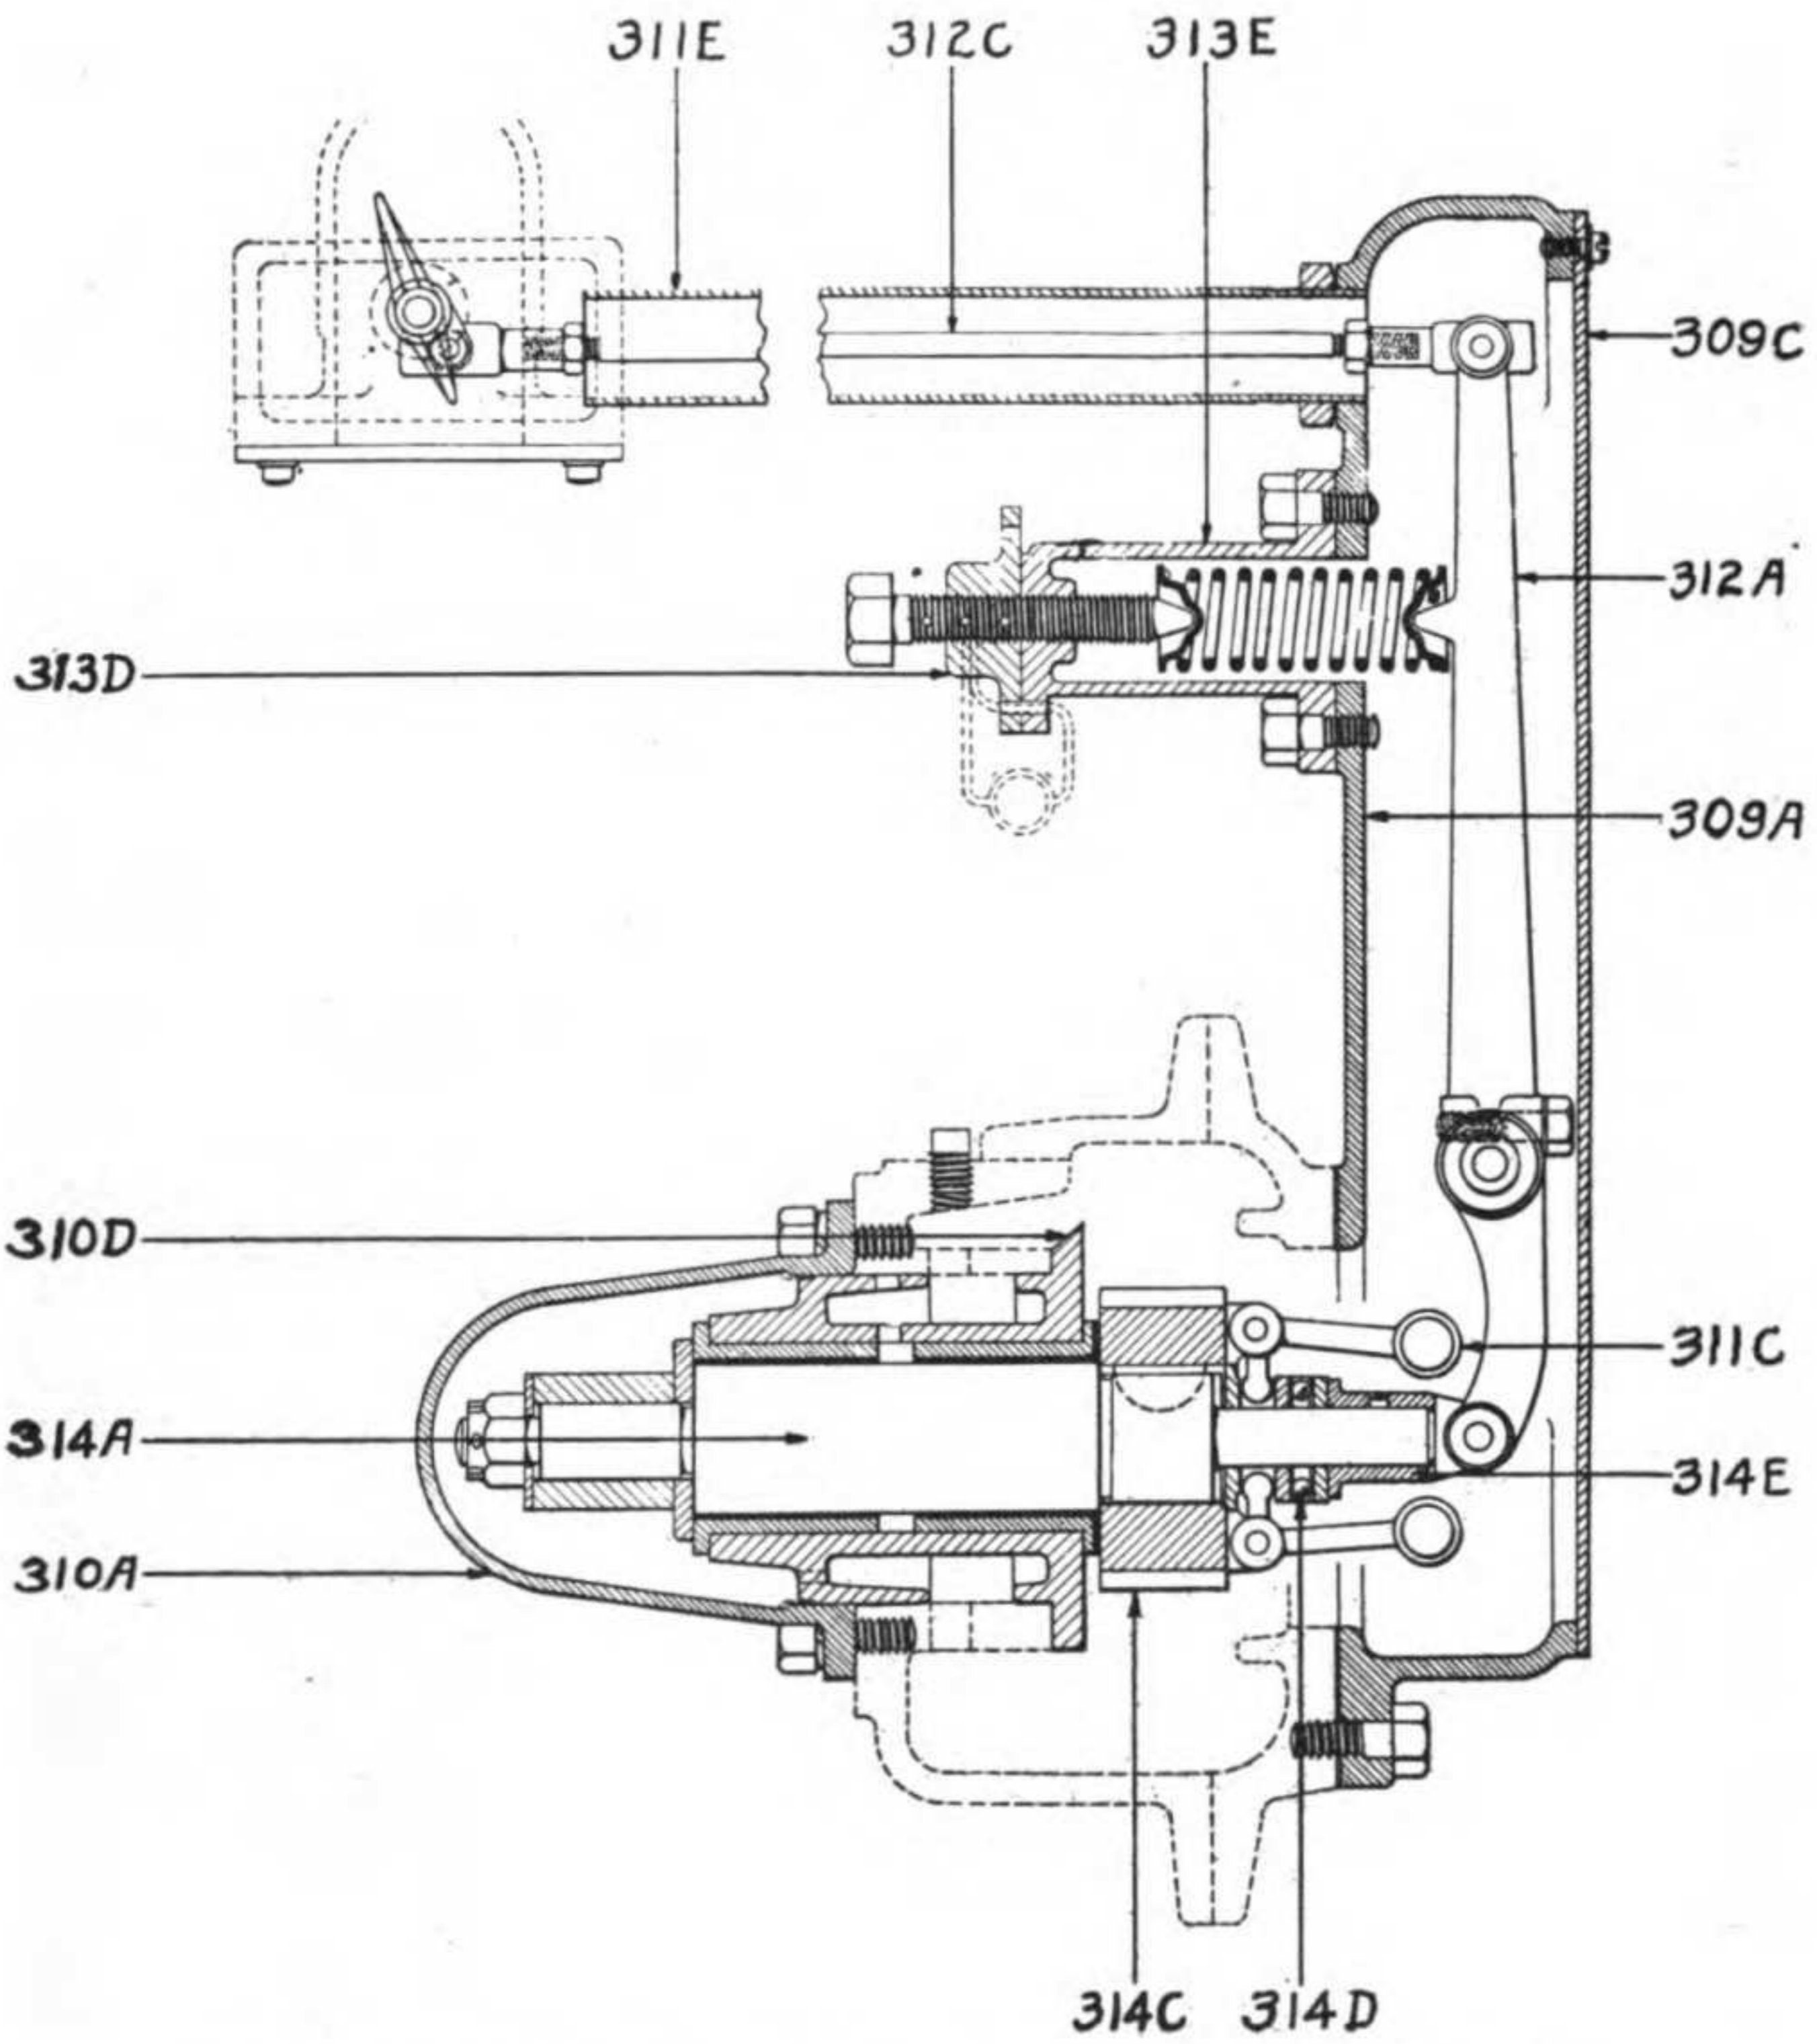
SECTIONAL DRAWING OF GOVERNOR
